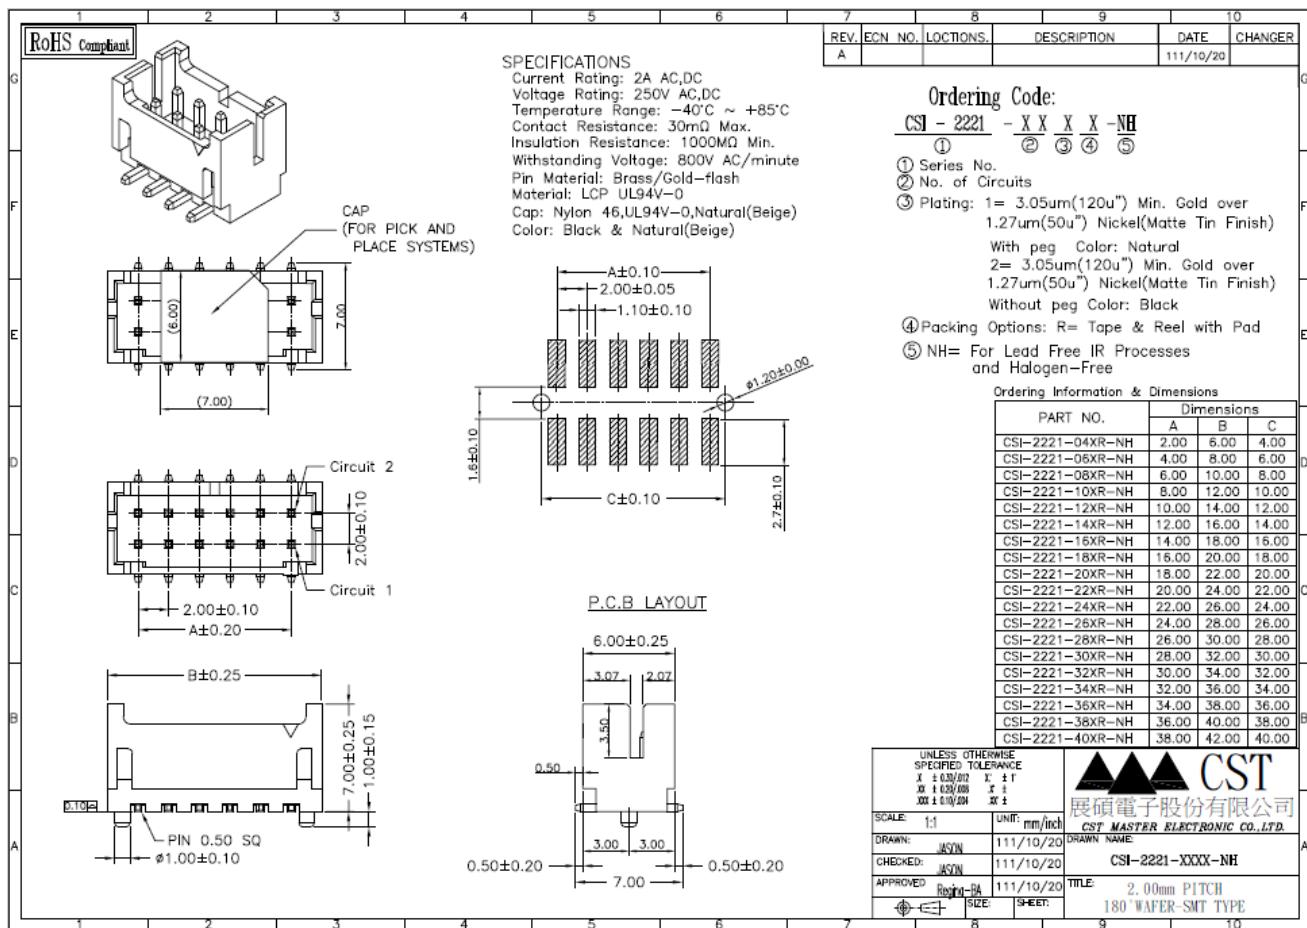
Wire to Board SMD 2*10P Connector Drawing
